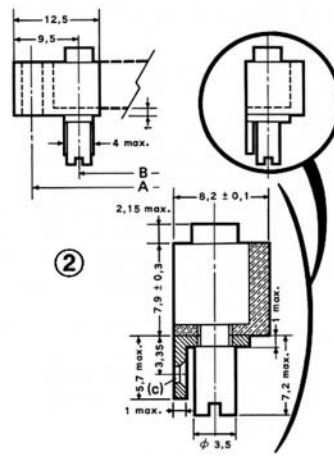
sockets with brackets (c) hole Ø 1.6 with 90° milling
